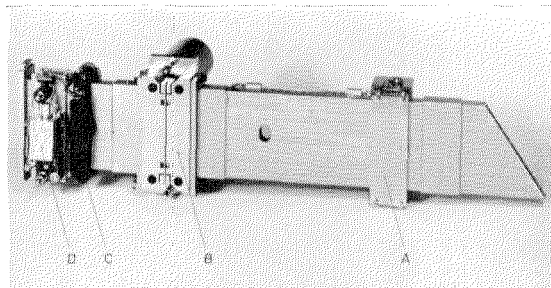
Automatic machine for folding one end of a ticket 100 by 60 millimeters (3.9 by 2.4 inches) to form a sail for propelling it without a carrier through a pneumatic tube.
